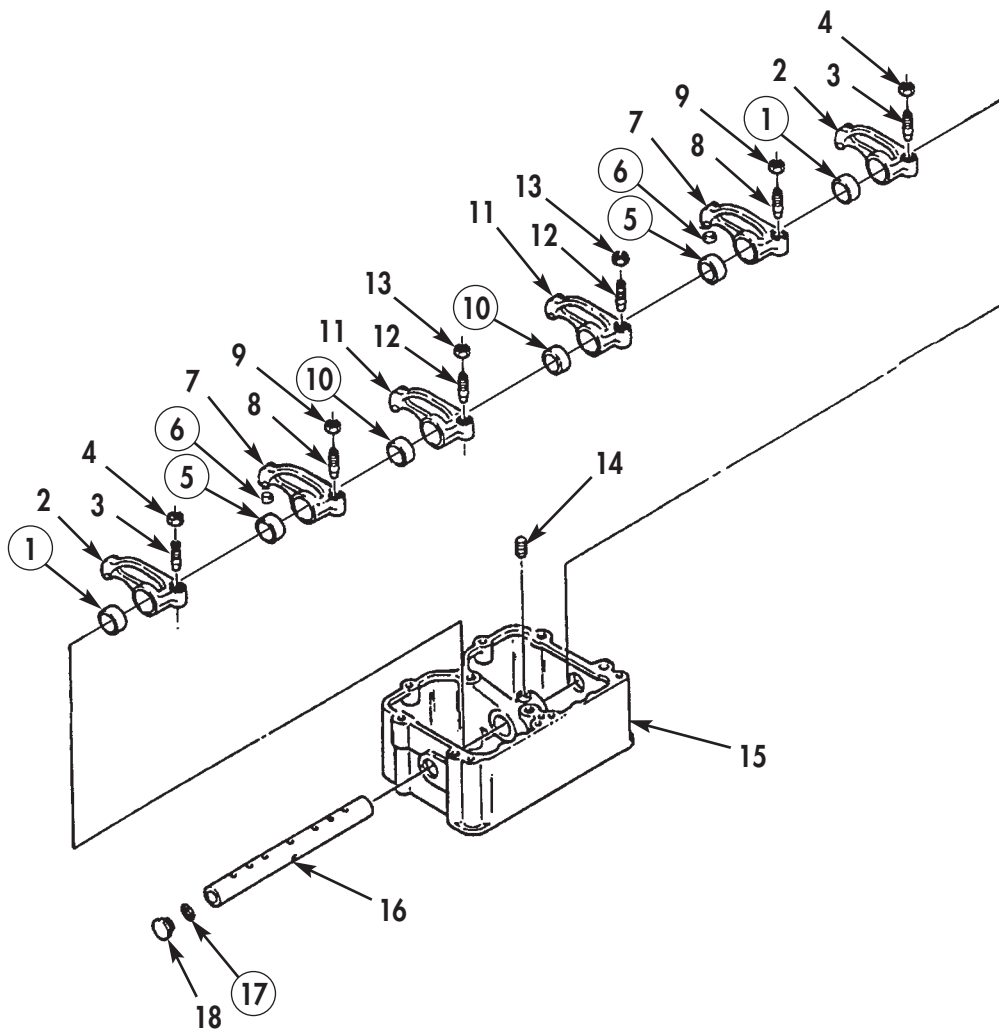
Rocker Levers and Rocker Lever Housing Assembly.
